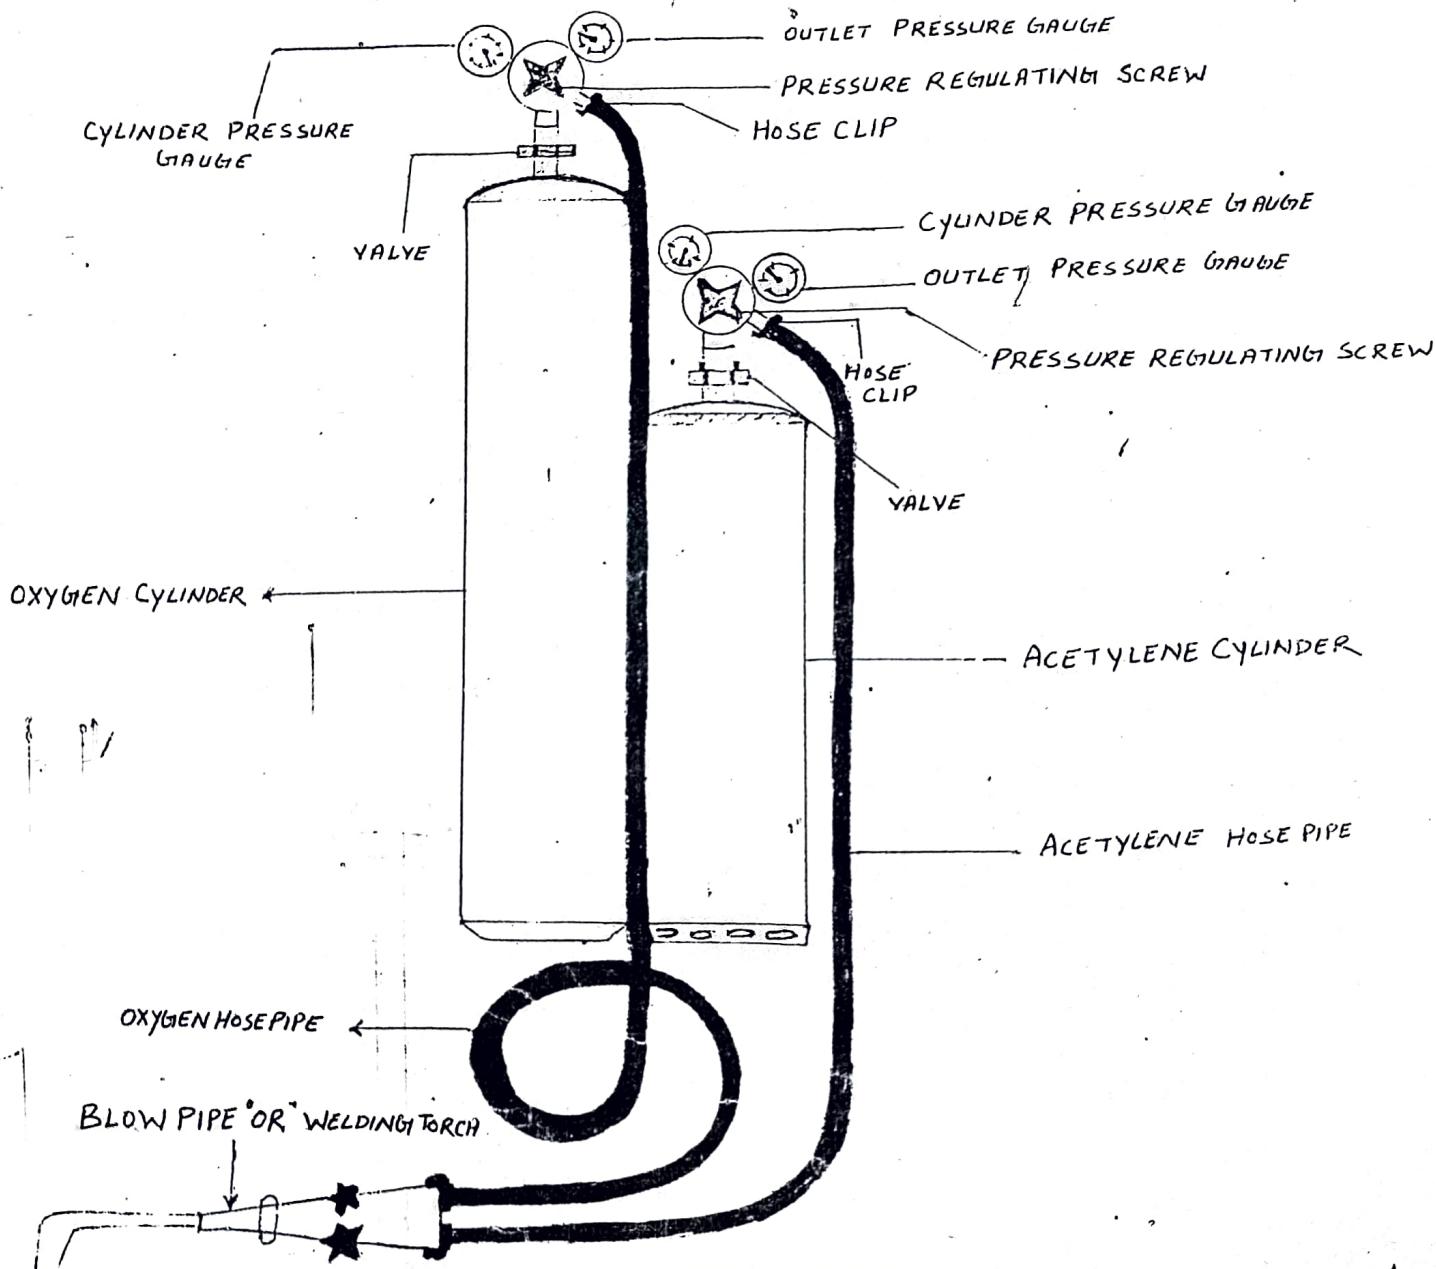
FIGURE: HIGH PRESSURE WELDING PLANT
